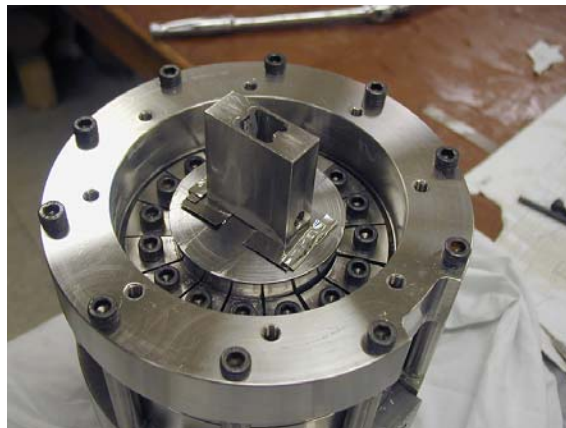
Stainless steel cone used to maintain void fraction of the cable to the desired level during heat treatment. During the experiment a threaded brass wedge will be used. The wedge will be pulled vertically using a linear actuator mounted on the top of the dewar.
